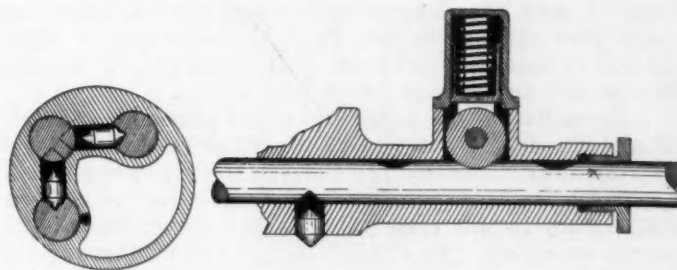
THE LOCKING MECHANISM USED ON THE SHIFT ROD OF THE FOUR-SPEED GEAR TRANSMISSION
